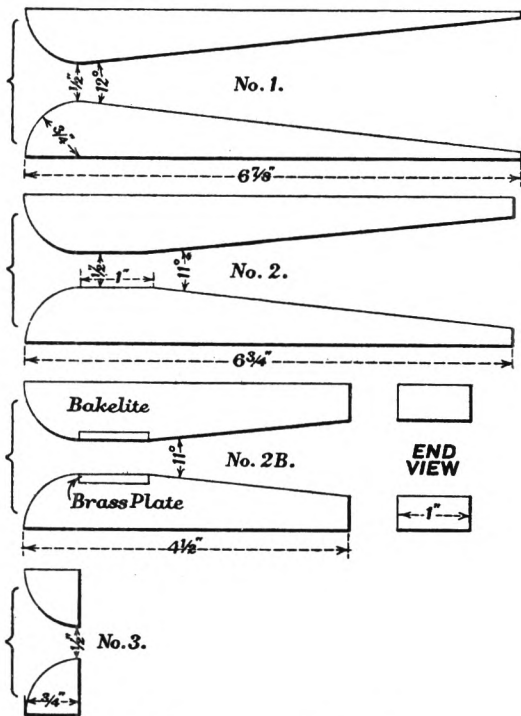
DIMENSIONS OF NOZZLE BLOCKS
